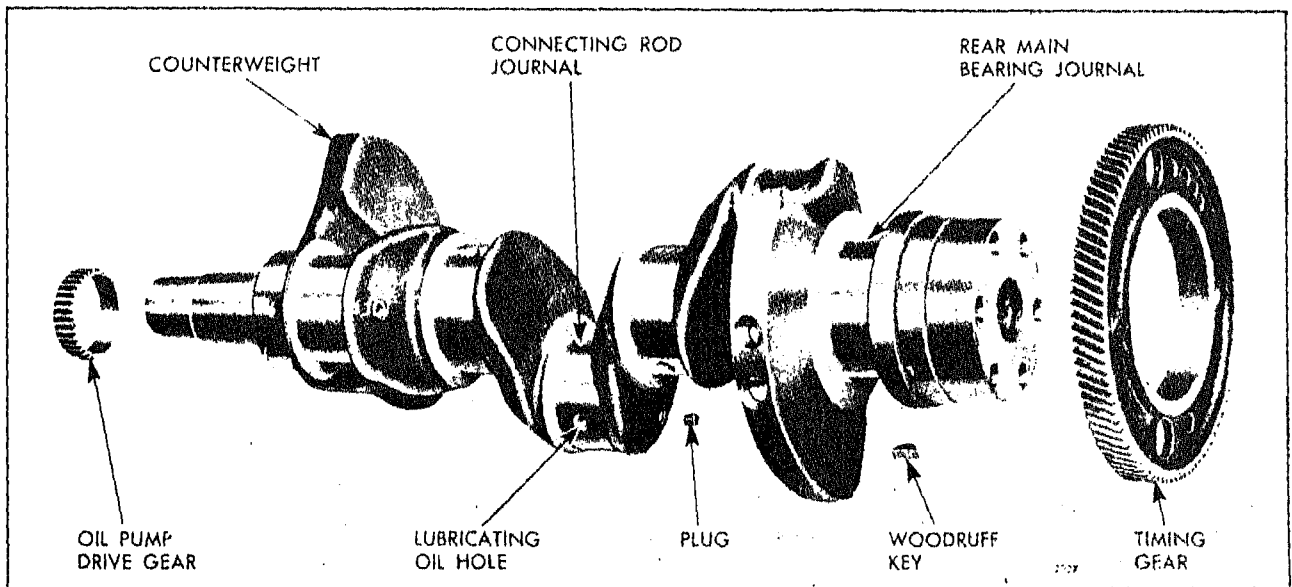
Crankshaft Details and Relative Location of Parts (Three Cylinder In-Line Engine Crankshaft Shown)
